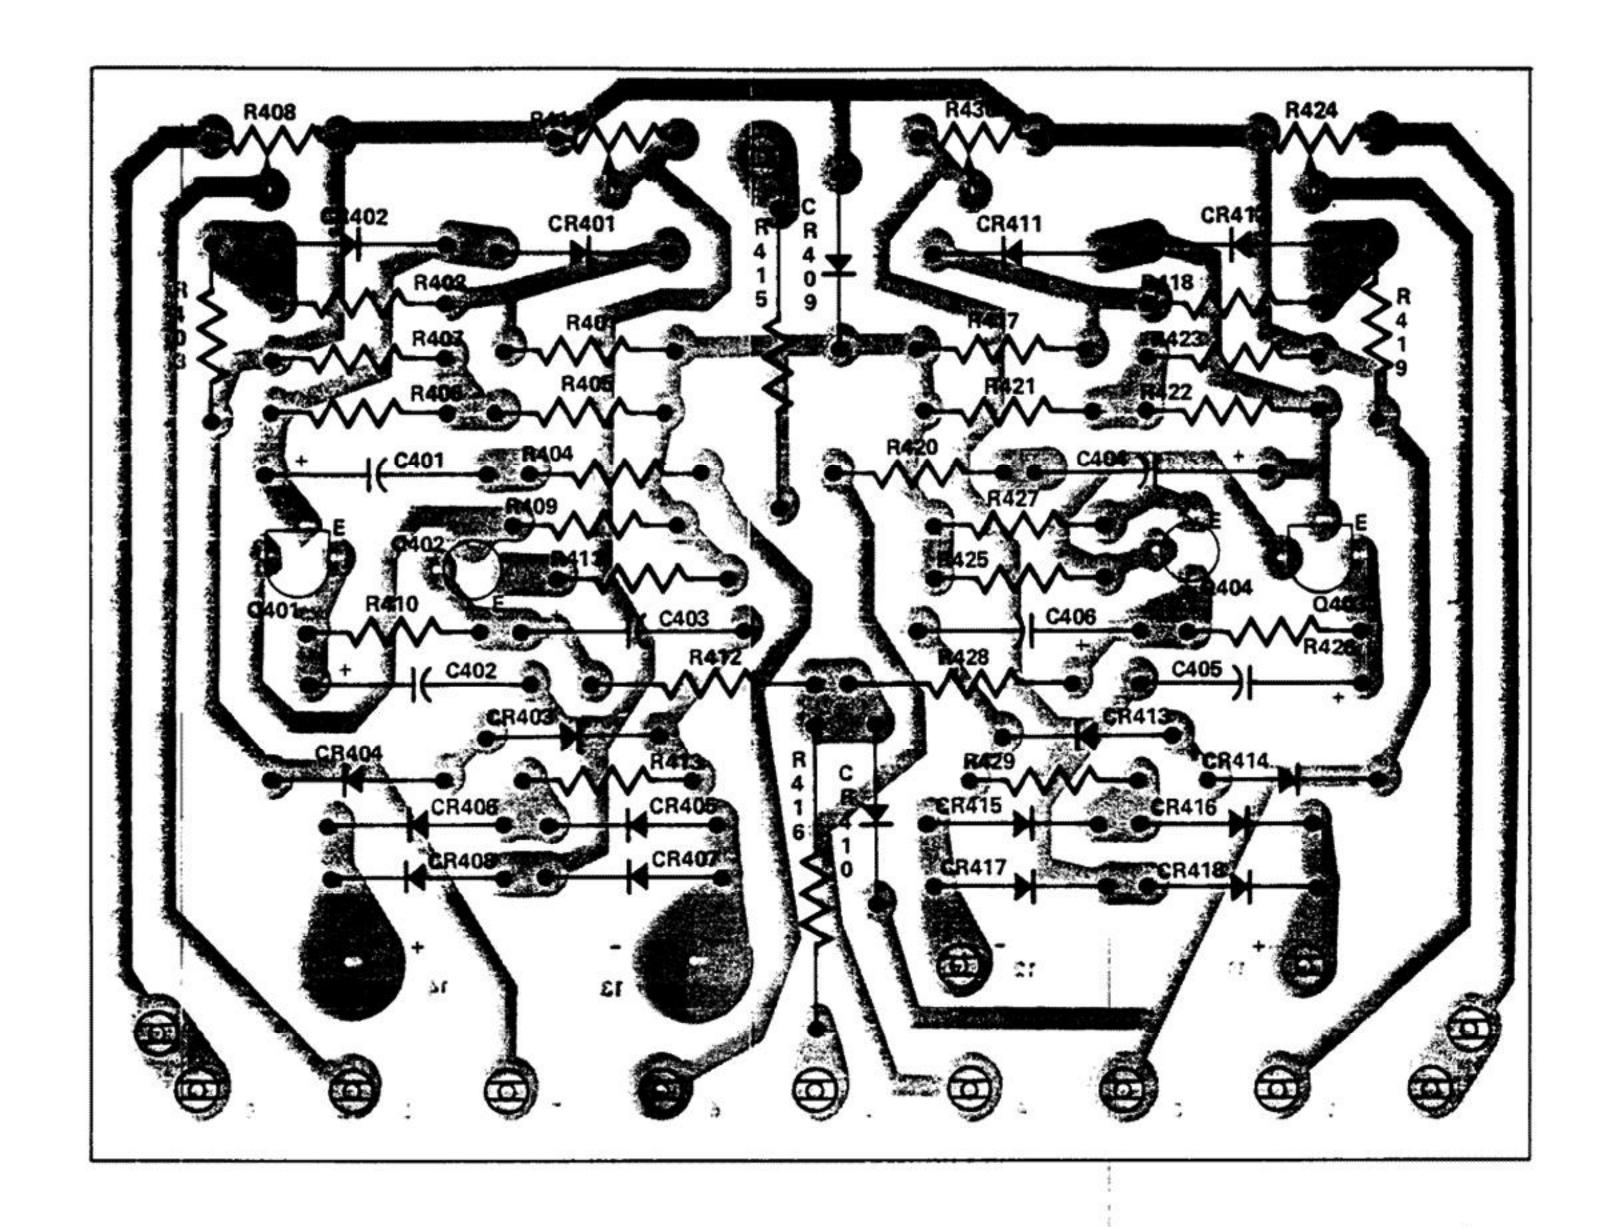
Rectifier/Relay Board Component Assembly Diagram
